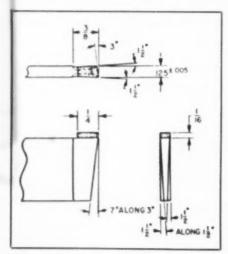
Carbide cut-off tool which gave best results for cutting off SAE 4620 tubing.
